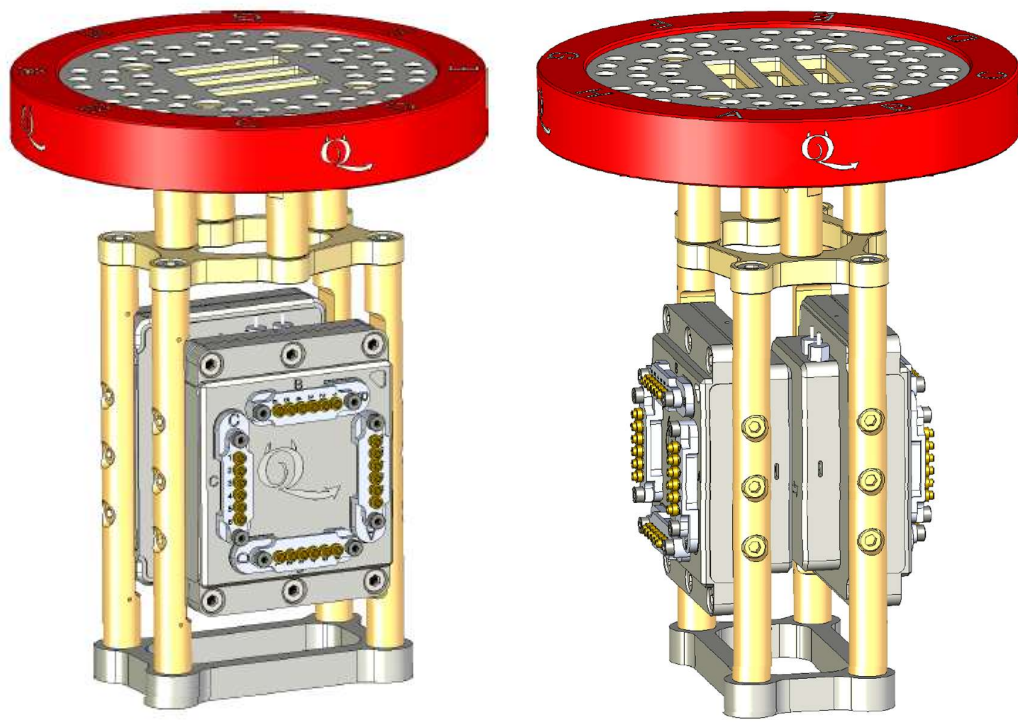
CAD drawing of the top flange with 2 x QCage.24 mounted inside. Left) Front view. Right) Side view.
